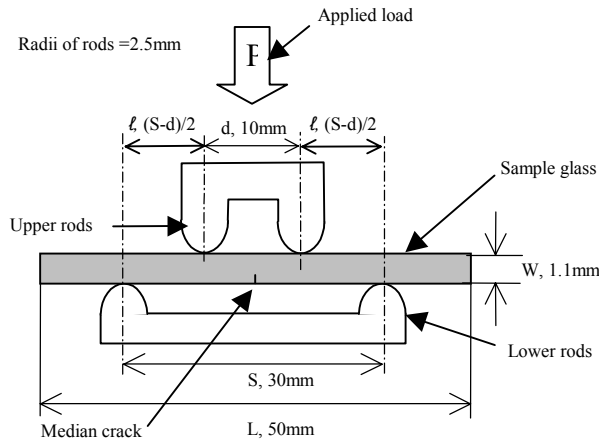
Schematic illustration of upper and lower rods of four-point-bending test machine.
